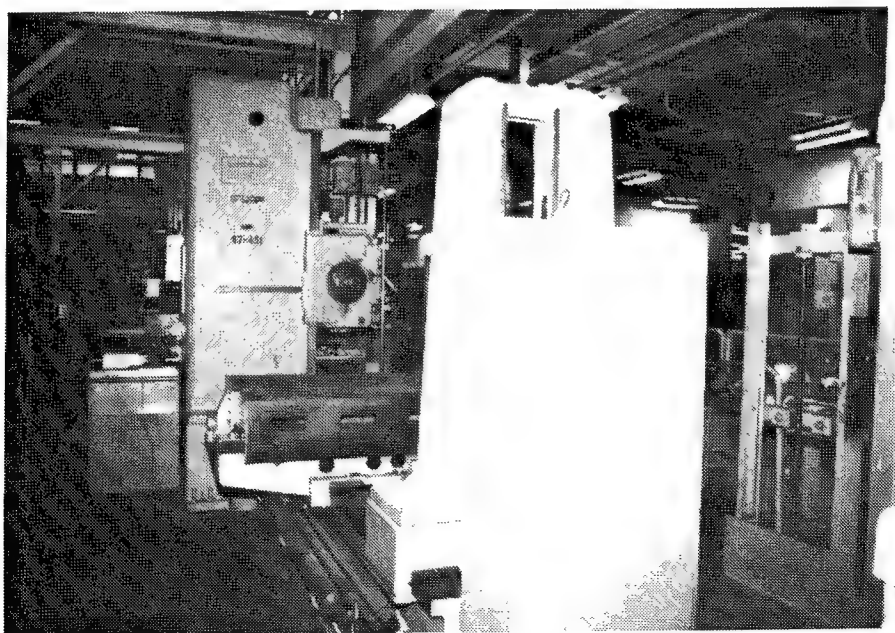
Building 3: Boring Mill located in the Machine Shop Area of Building 3. This machine was manufactured by the Gilbert Machine & Tool Co.
